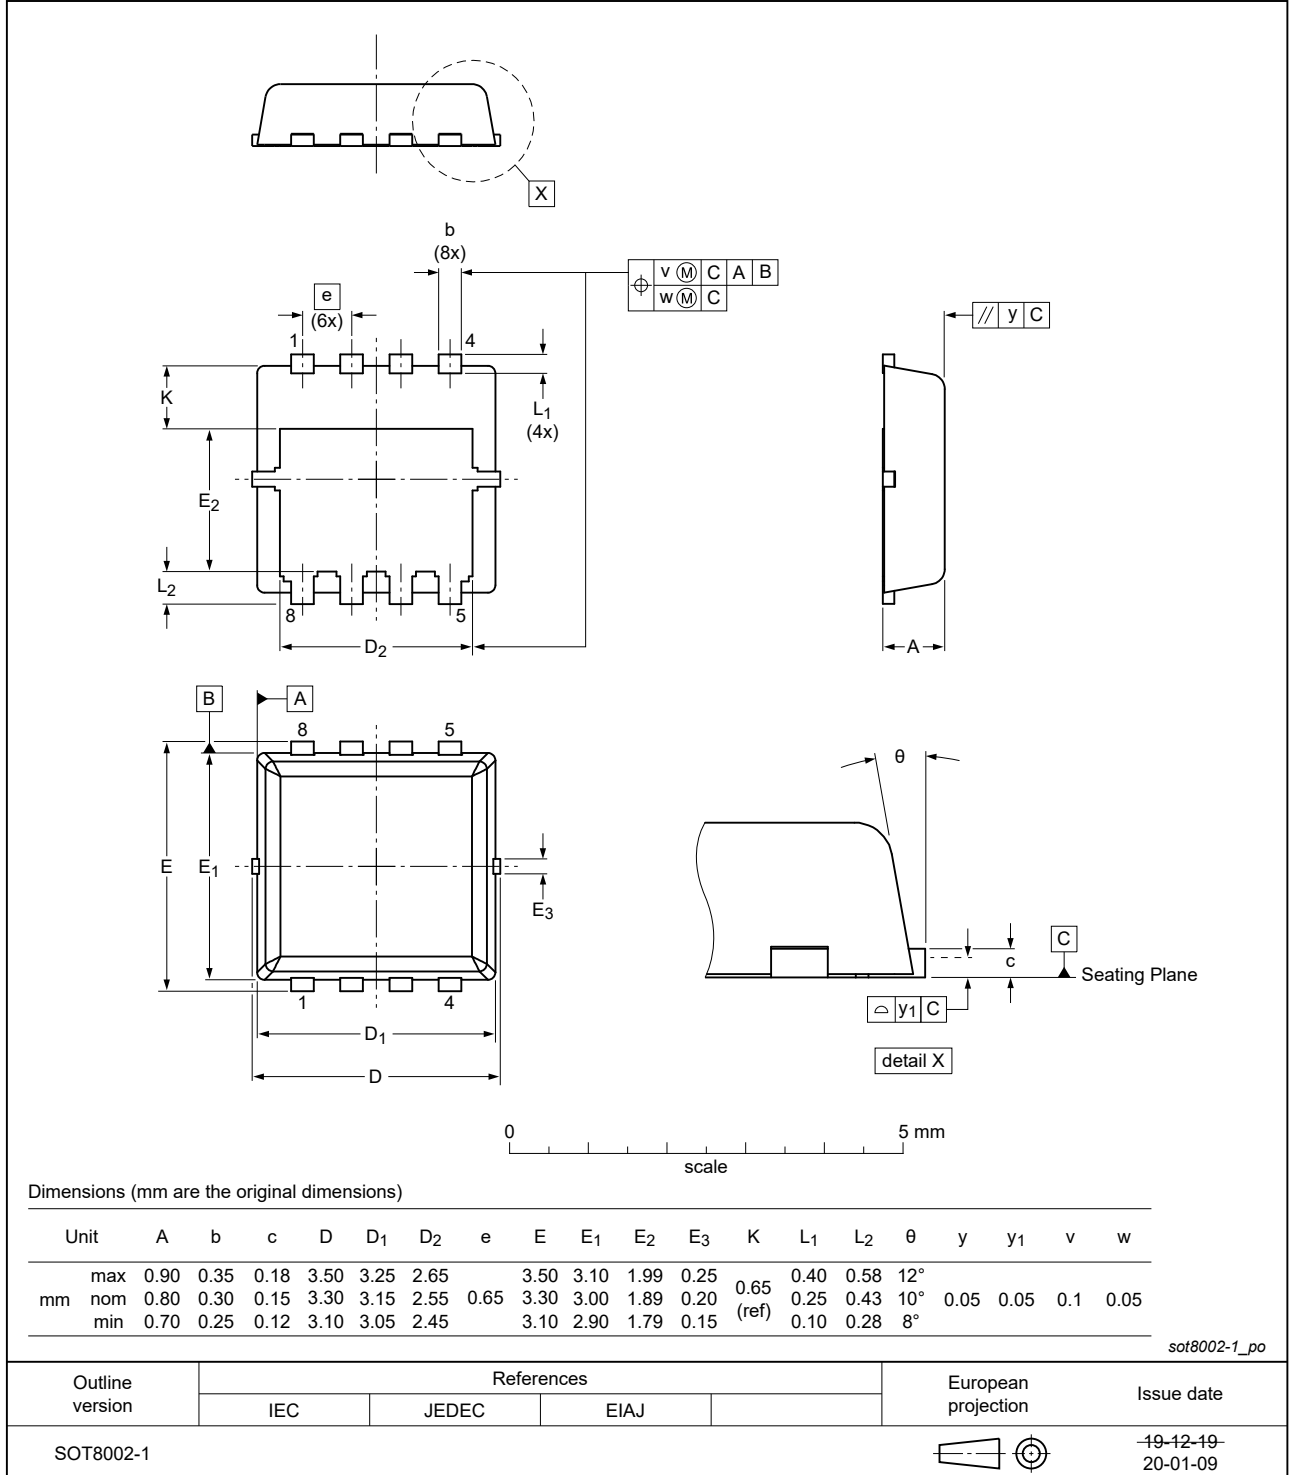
Package outline MLPAK33 (SOT8002-1)
